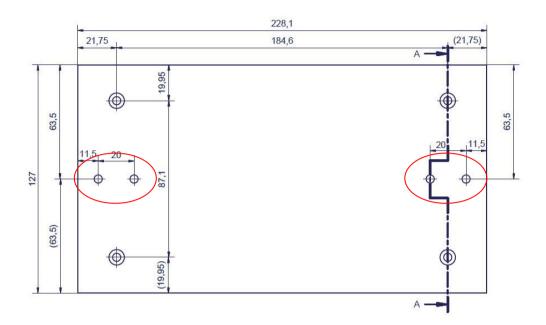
Bottom view of the IPC/SL71 (product image may vary)
